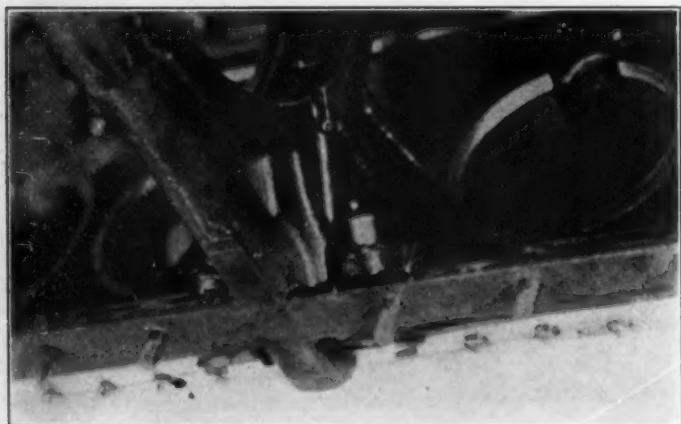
THE OIL JET WHICH SUPPLIES LUBRICANT TO THE OIL RING ON THE CRANKSHAFT
